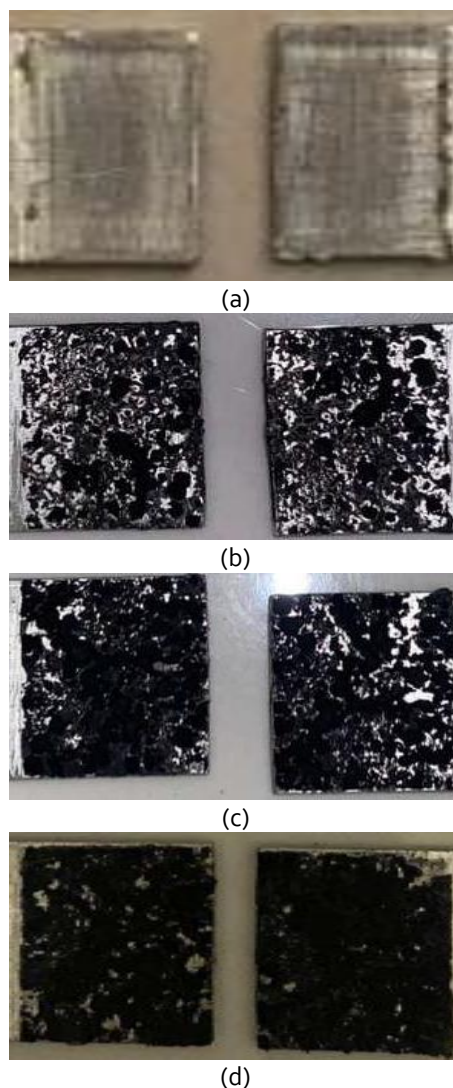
Fracture surfaces following shear testing on samples with added carbon black: (a) 0 wt%, (b) 8 wt%, (c) 16 wt%, and (d) 24 wt%.
